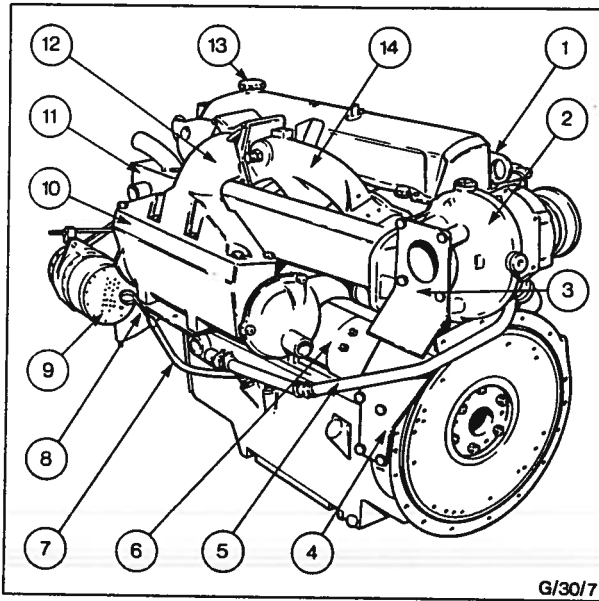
6 Cylinder Intercooled Marine Engine
